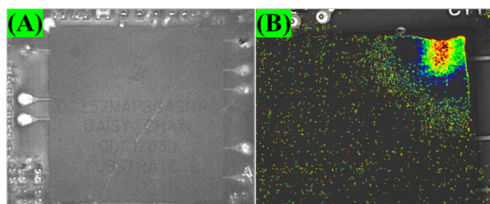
Component 2 test under step stress test at board level (A) component view (B) LIT
